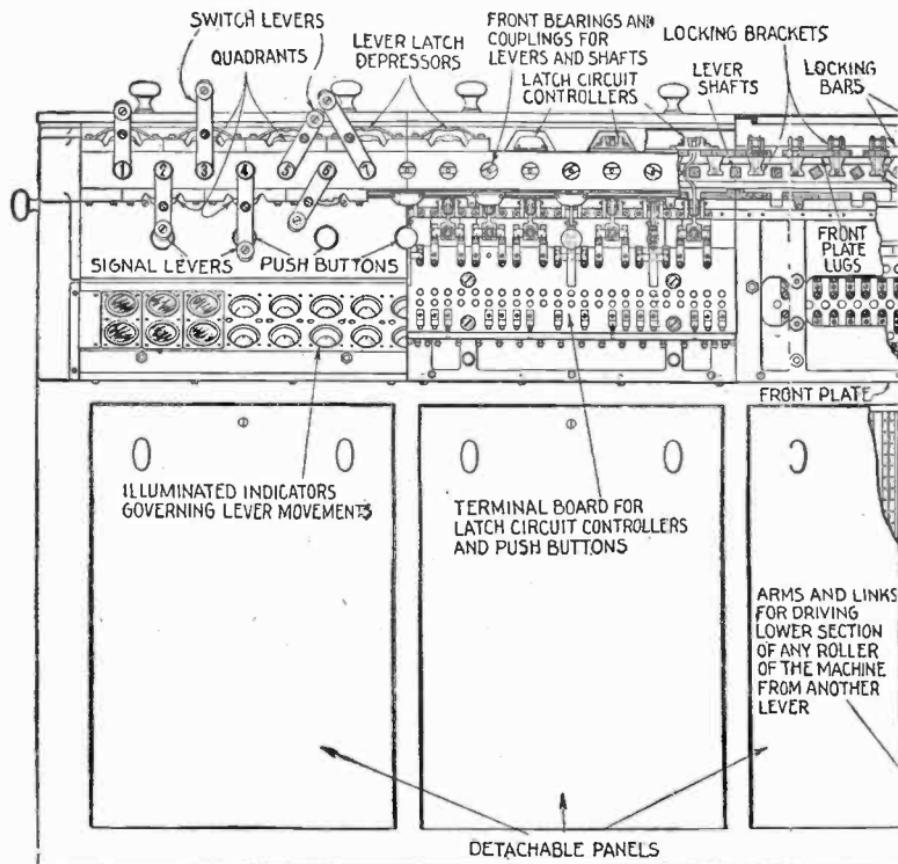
,661.—Union S. and S. Co. electro-pneumatic interlocking machine complete. Side view showing signal levers, terminal board, locking bars, quick switch, indication magnets, etc. This illustration is continued on page 3,995.
